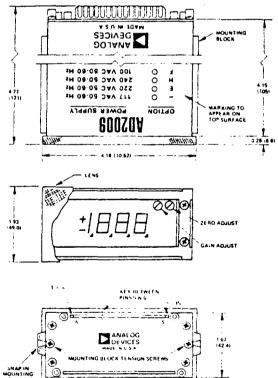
AD2009 Mechanical Outline (Dimensions shown in inches and (mm))
